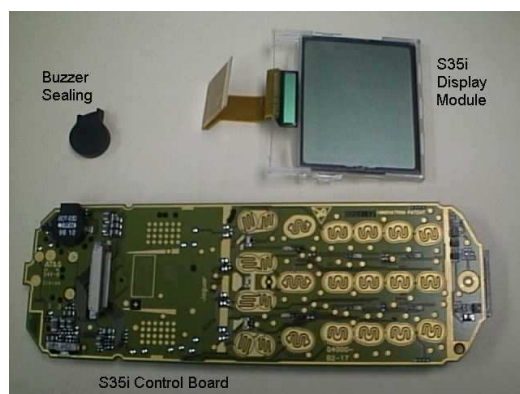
Disassemble Control Board Assy – STEP 2
